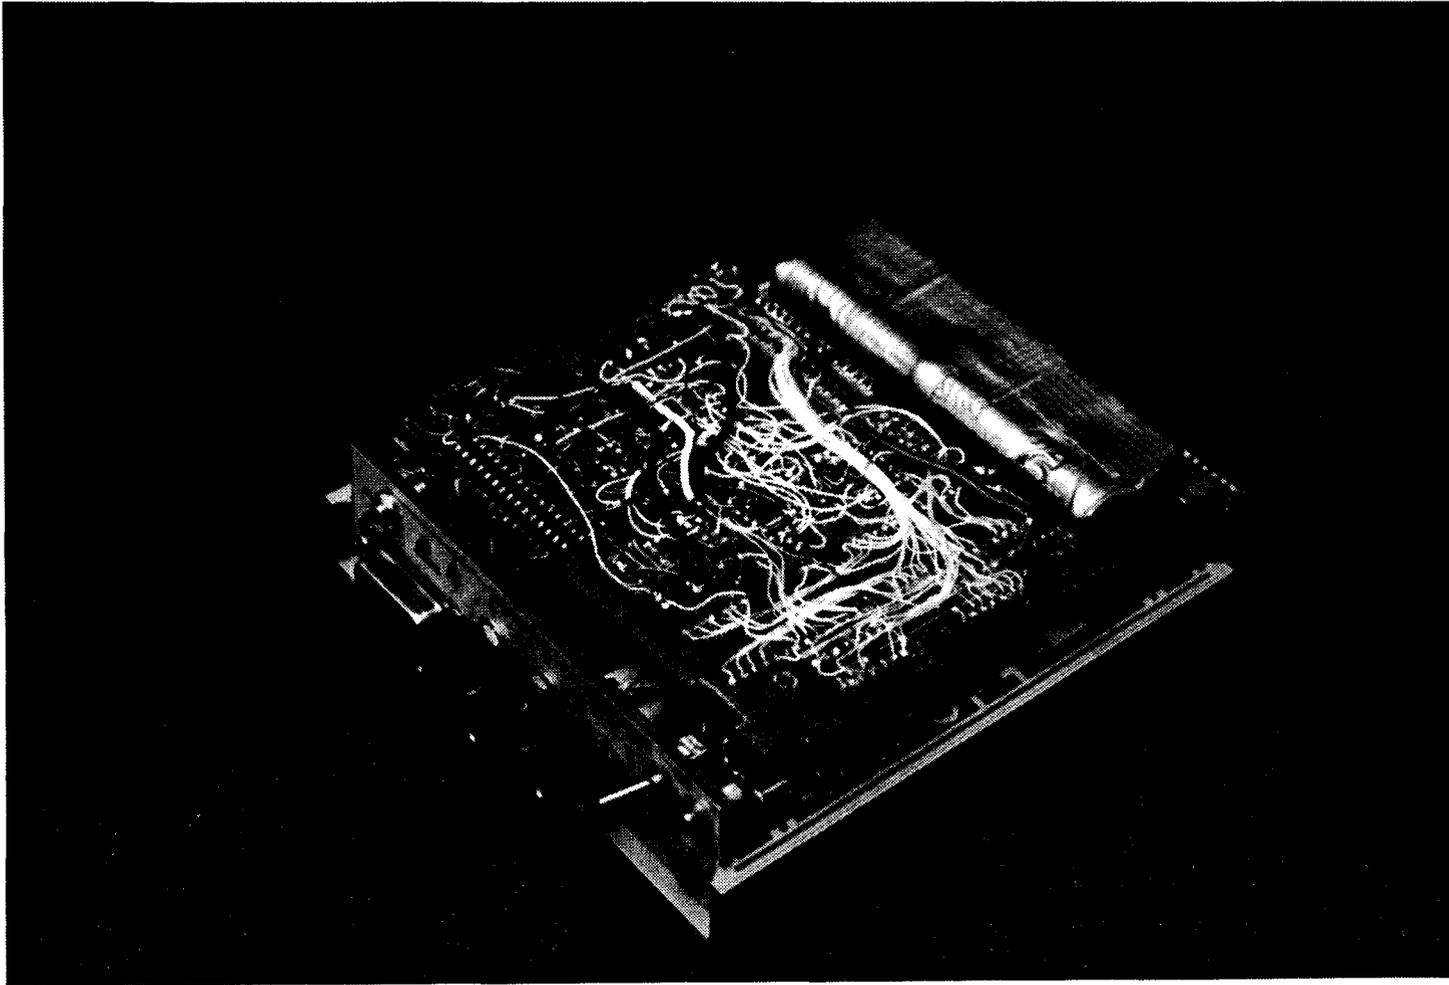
View showing wearable speech processor with case removed. Bottom of output driver board is seen with rechargeable battery pack at back.
